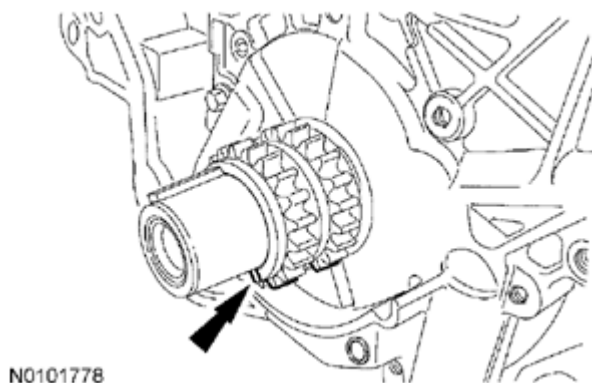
Locating Crankshaft Sprocket With Timing Mark Facing Out
